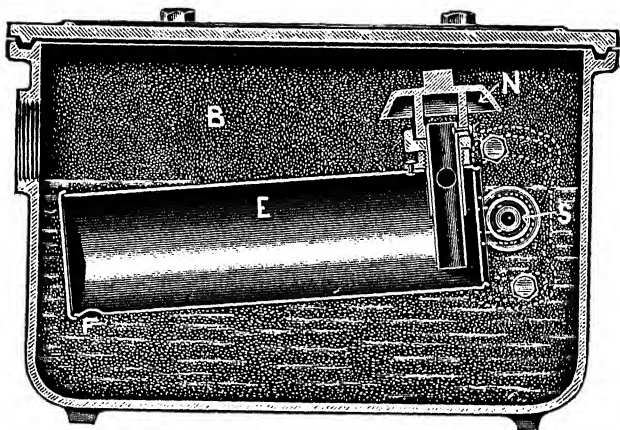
Lancaster Steam Trap : 1903 Type—Sectional End View.
